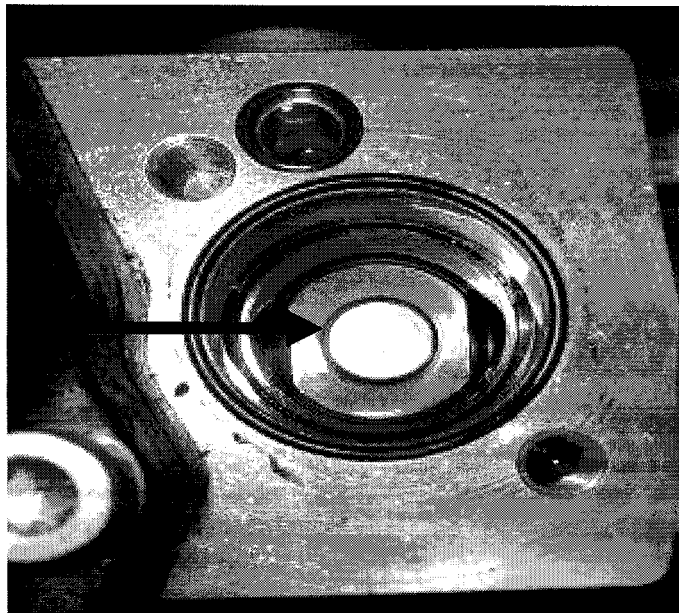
High Pressure Fuel Pump Metal Puck Placement
